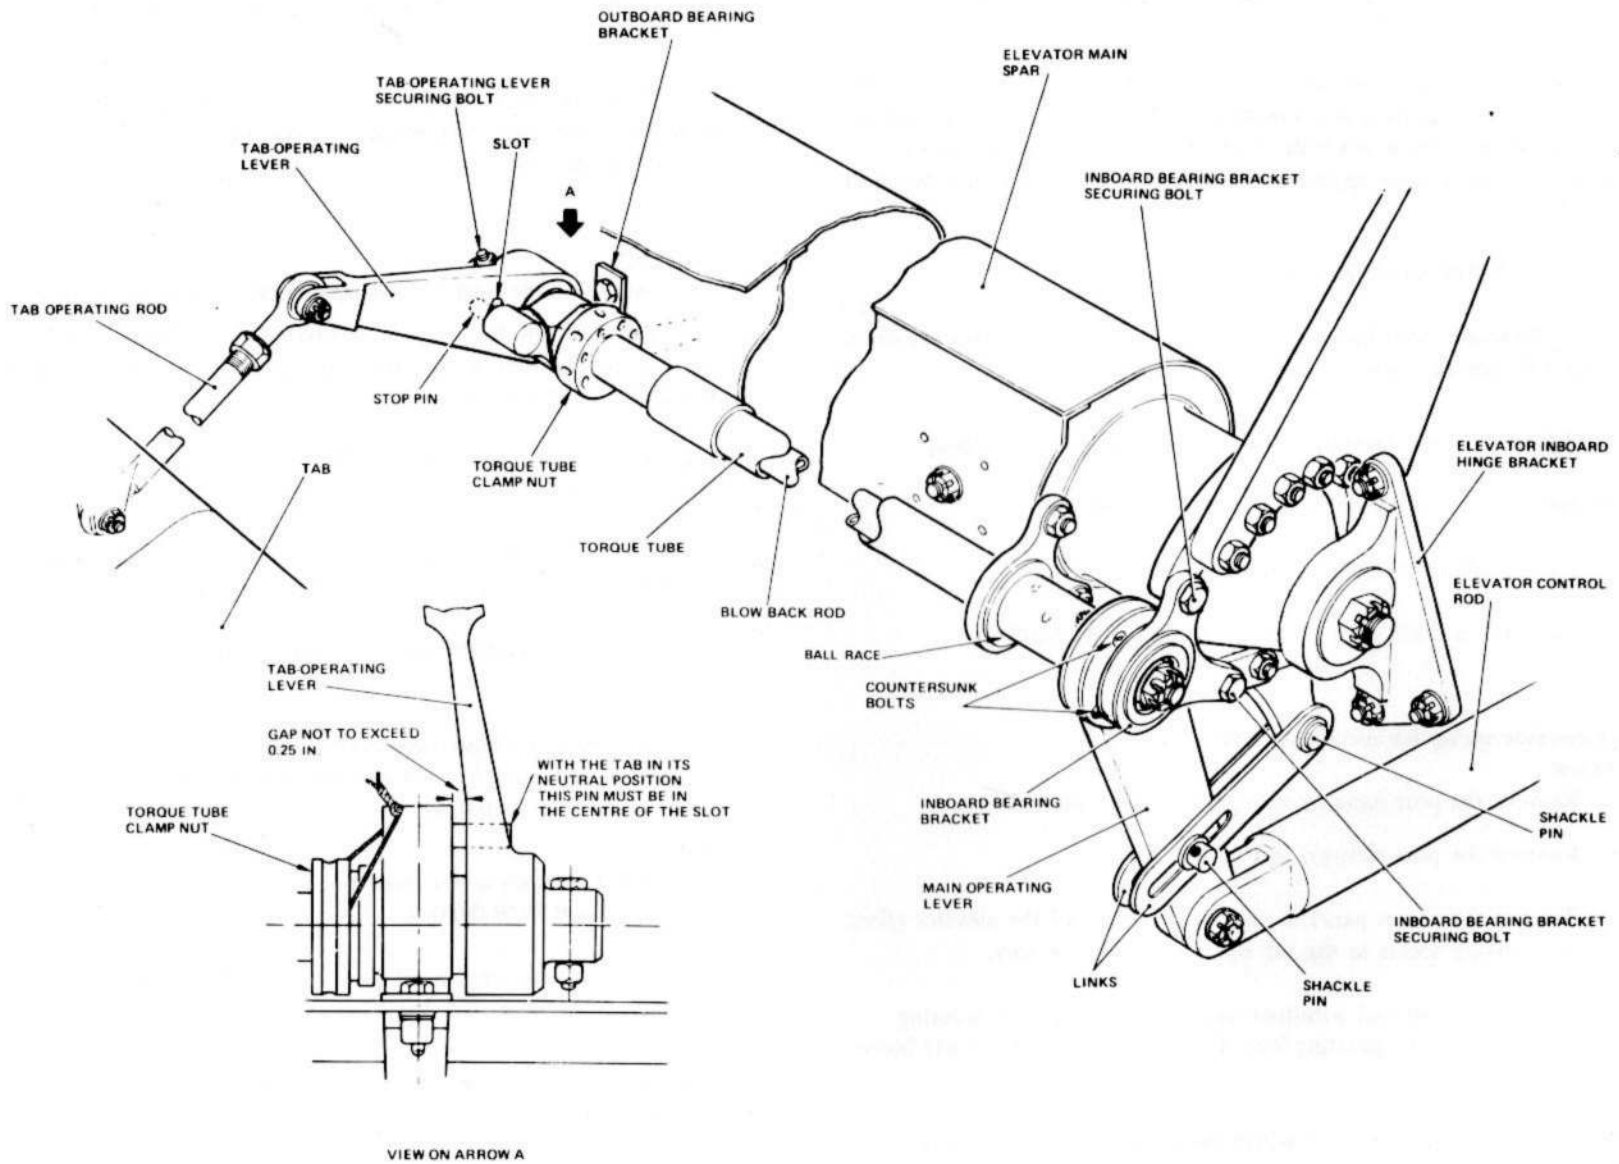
PORT ELEVATOR SPRING TAB MECHANISM REMOVAL
